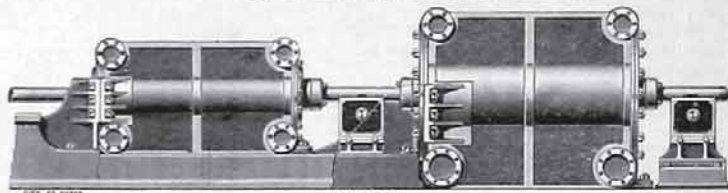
TANDEM COMPOUND ENGINE, SHOWING APPLICATION OF ROLLER SUPPORT TO PISTON RODS.
